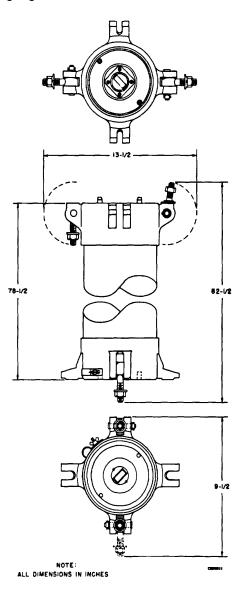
Mast AB-588/TPS-25, Dimensional Drawing.
